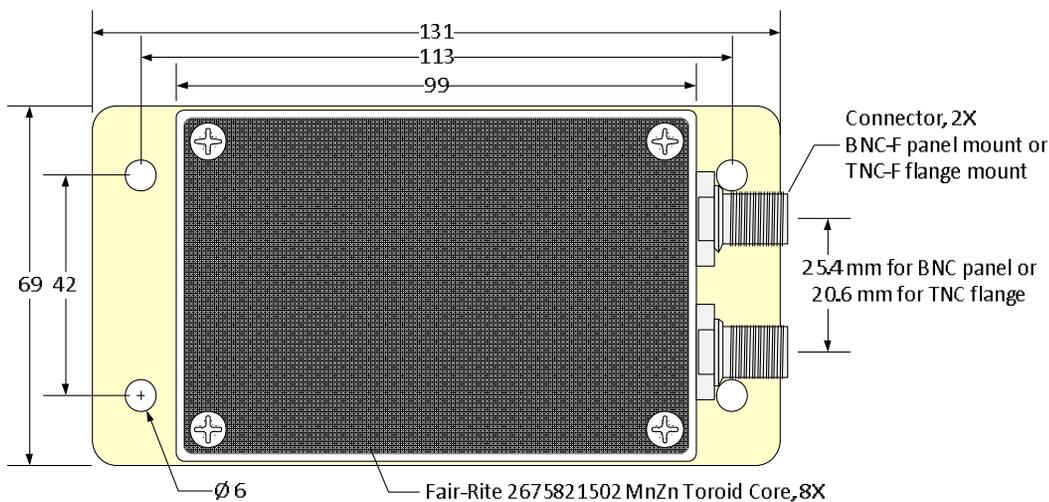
~ 75% scale drawing showing basic enclosure dimensions (mm) as measured. The binocular core is not centered. Both connectors were placed at one end to ensure enough space for internally connecting the coax to the connectors and to allow the enclosure to shield the connections from rain. ©2020 W. Reeve
